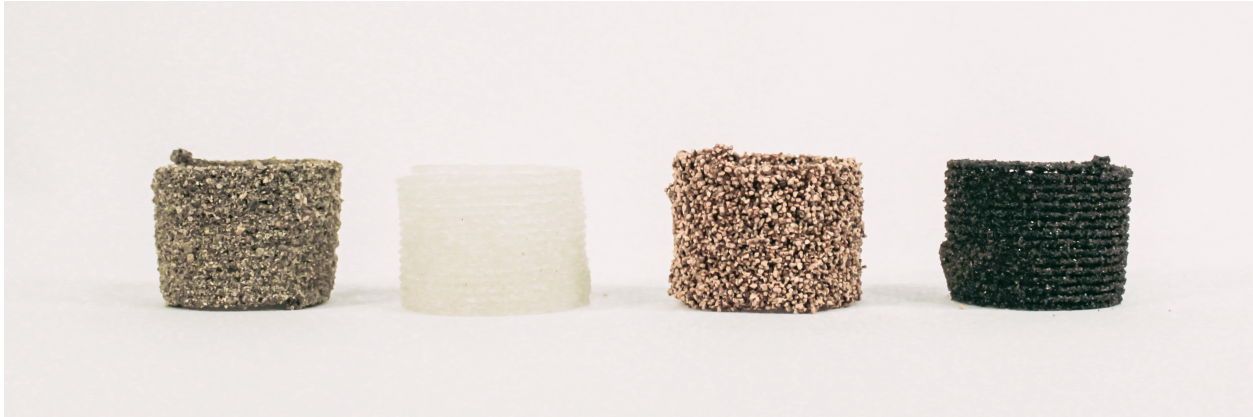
3D printed granular material samples including sand, glass beads, walnut shell, and aluminum-oxide.
